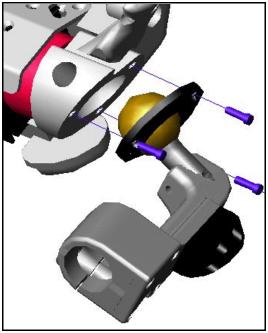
Pelvis Ball Joint/ Socket Adaptor exploded assembly
